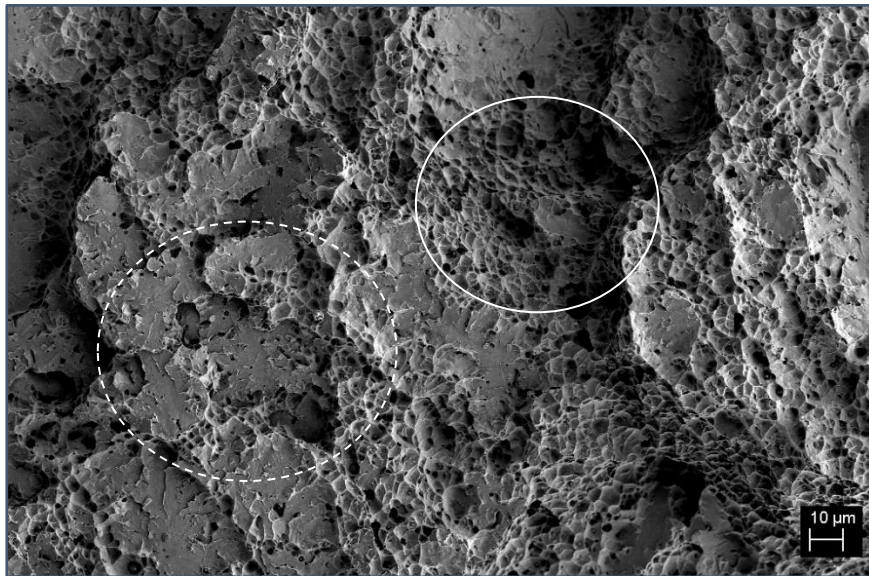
SEM micrograph of the fracture surface of Weld 4 (IR HAZ). The sample shows regions of extensive brittle fracture interspersed with ductile fracture. Brittle fracture is indicated by the dashed circle and ductile fracture is indicated by the solid circle. The sample contained 0.18 mass% Mo and no Ni. The sample had an impact energy of 28 J_(5mm) and a hardness of 241 HV10.
